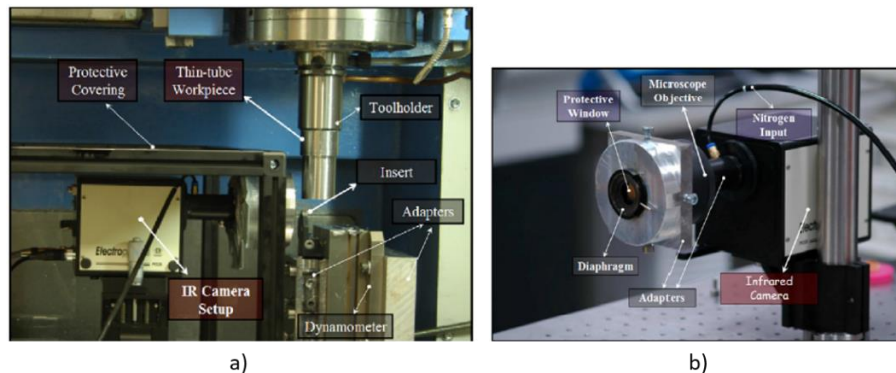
a) Vertical CNC milling machine used for instrumented orthogonal cutting tests, b) IR camera system for temperature measurement in [Dinc, 2008].
